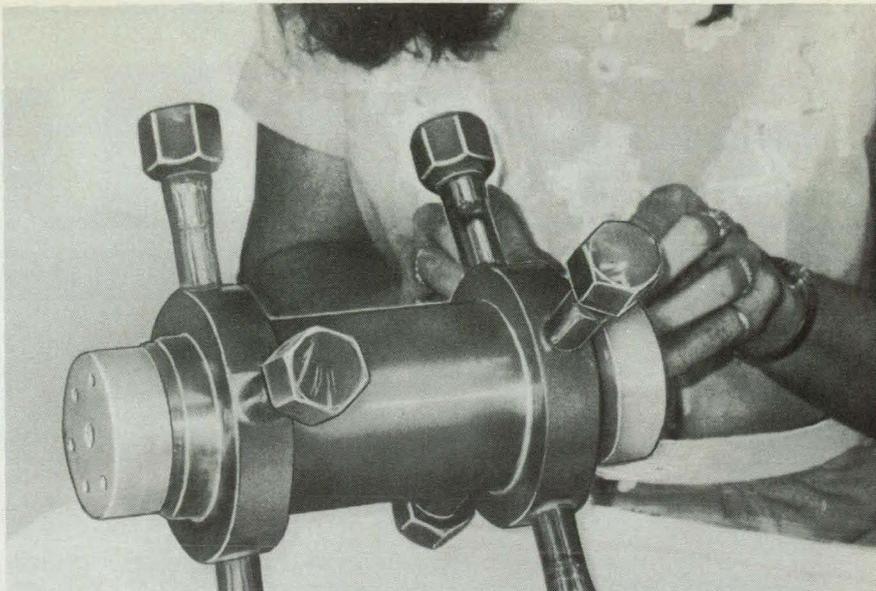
Prefabricated Manifold Inserts are installed on a tube assembly in preparation for electroforming.
